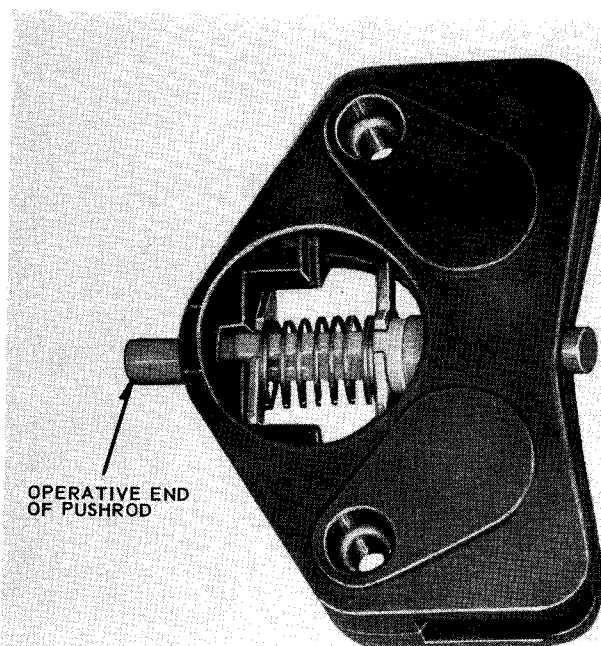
Interlock Set for Normally Open Operation (Shown with Sealing Cap Removed)
